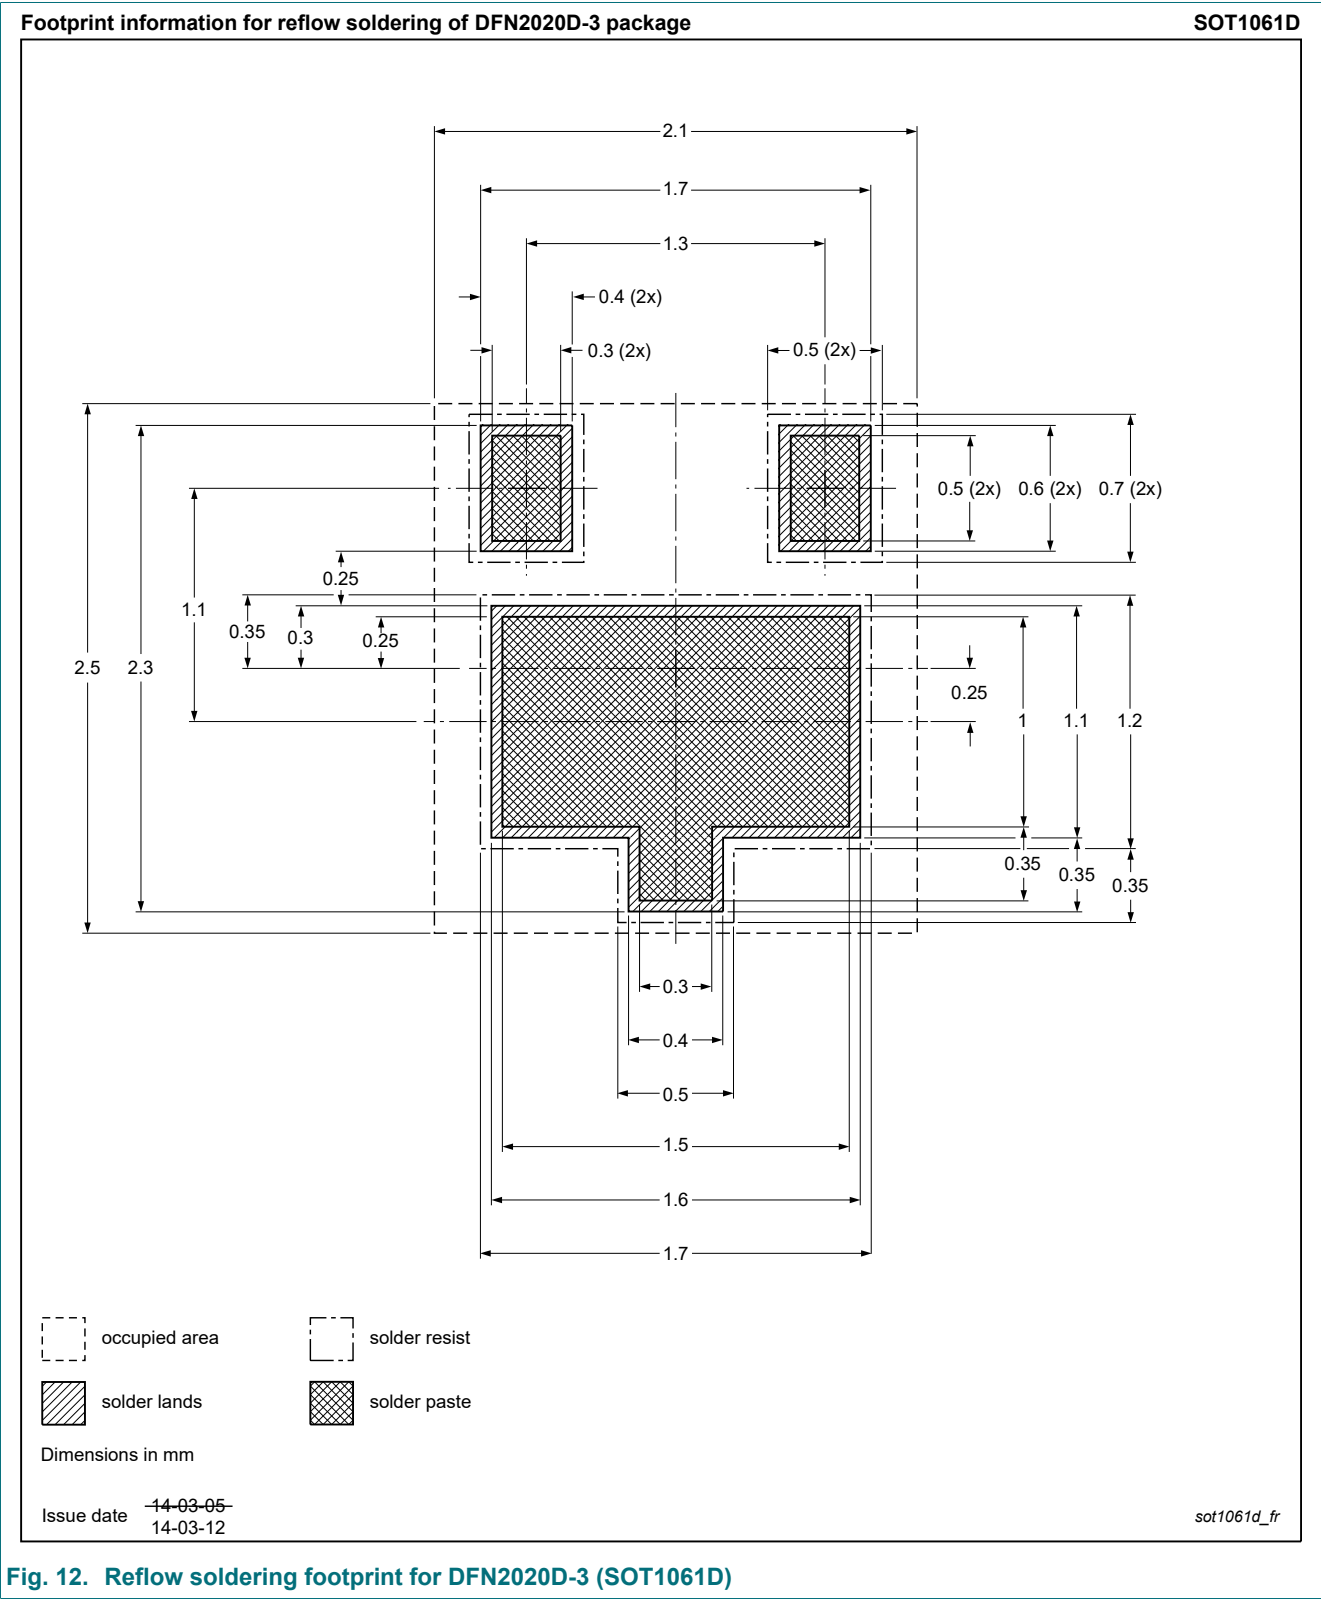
Reflow soldering footprint for DFN2020D-3 (SOT1061D)
